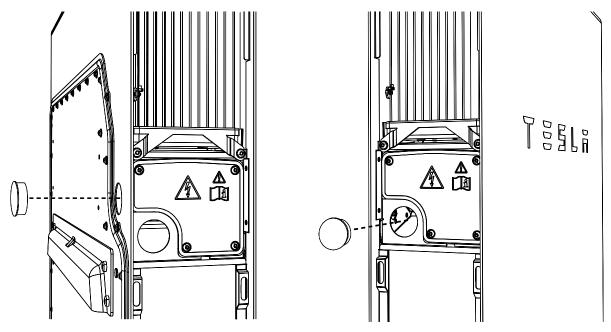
Moving the Back Cable Entry Plug to the Side Cable Entry Port
